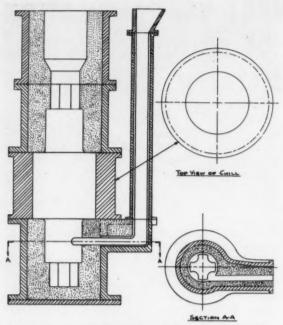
Arrangement for chill-casting rolls showing device for producing swirl. (Courtesy of Blaw Knox Co.)
